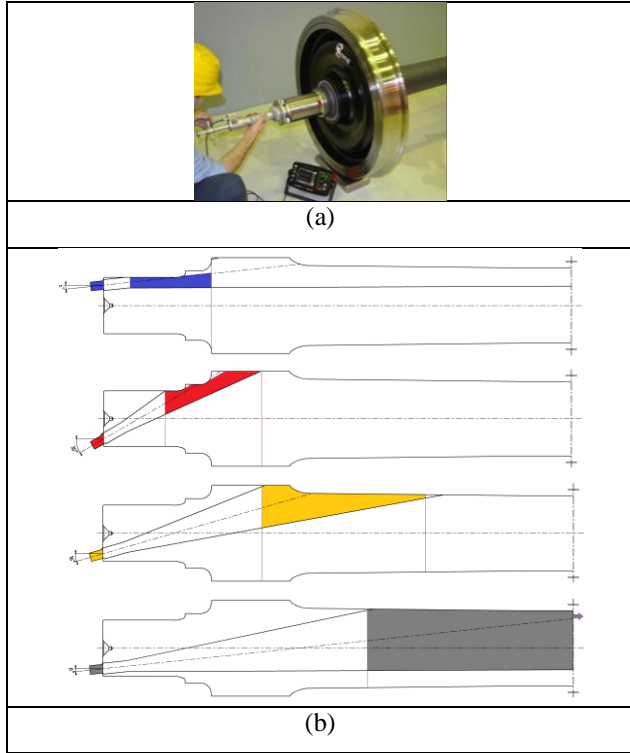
Rotating probe for ultrasonic inspection of solid axles from their ends
